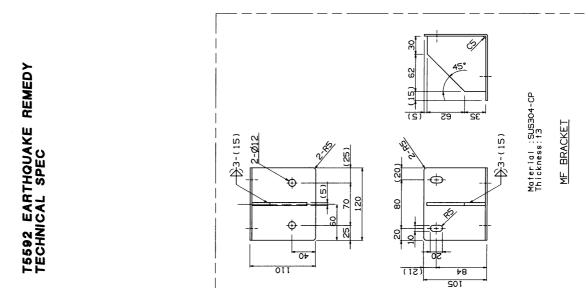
T5592 Earthquake Remedy Technical Spec(D Type Chiller)
